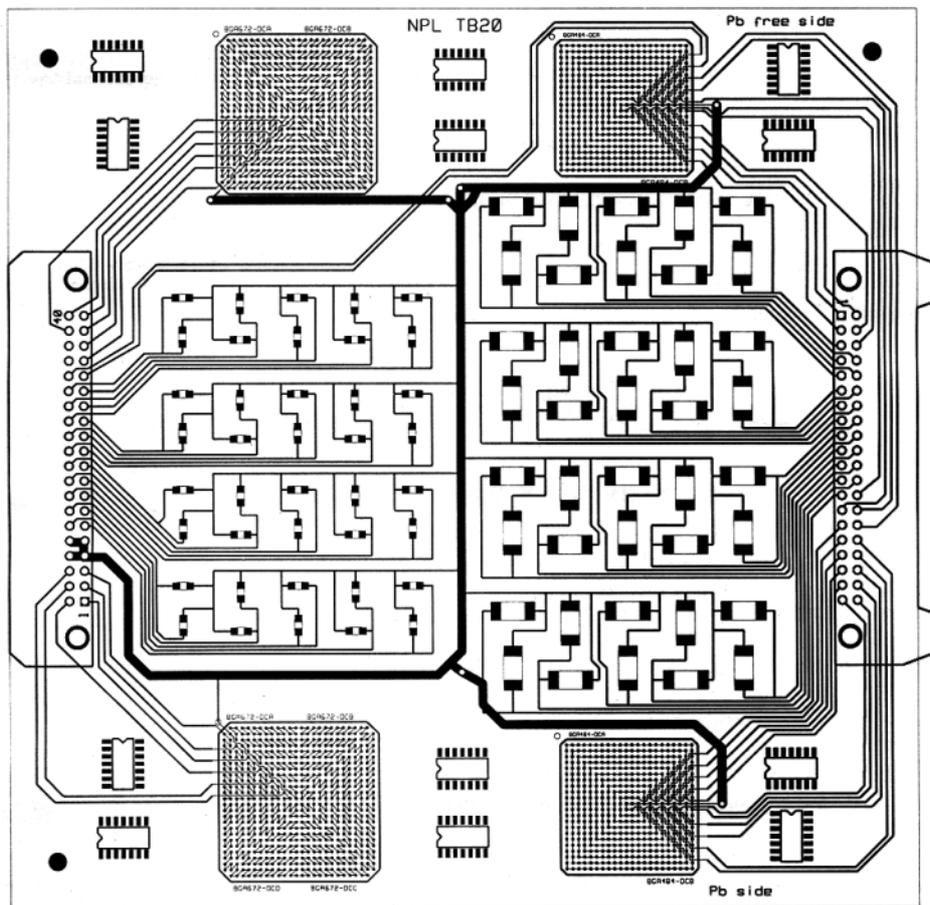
Example of test pcb layout, size 152 x 152 x 1.6 mm
